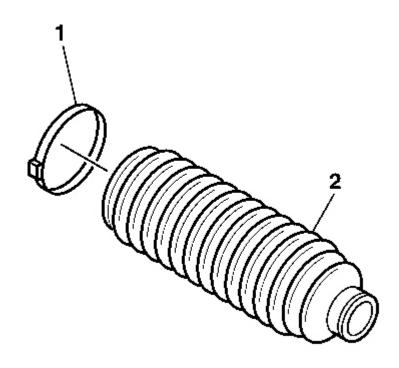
View Of Large Boot Retaining Clamp Courtesy of GENERAL MOTORS CORP.
